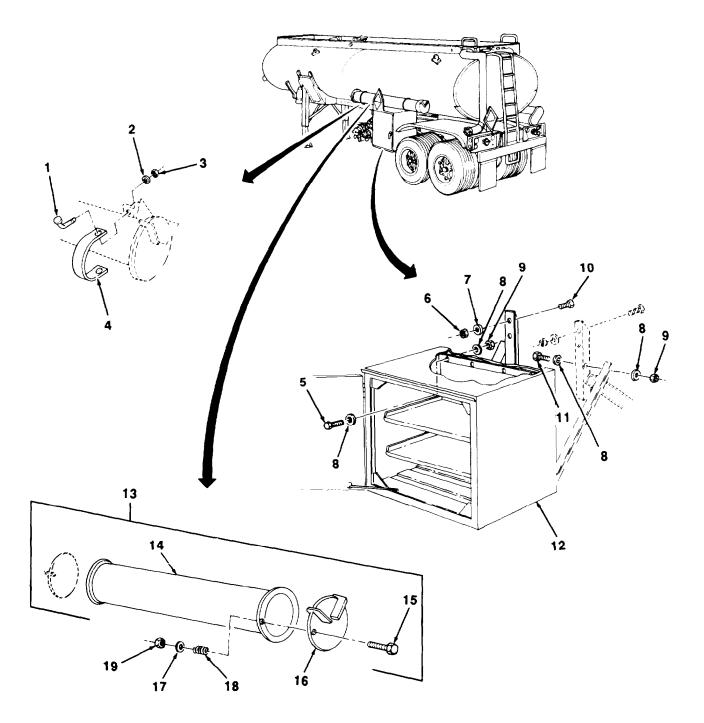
Ground Rod Tube Assembly, Stowage Cabinet, and Related Hardware.
